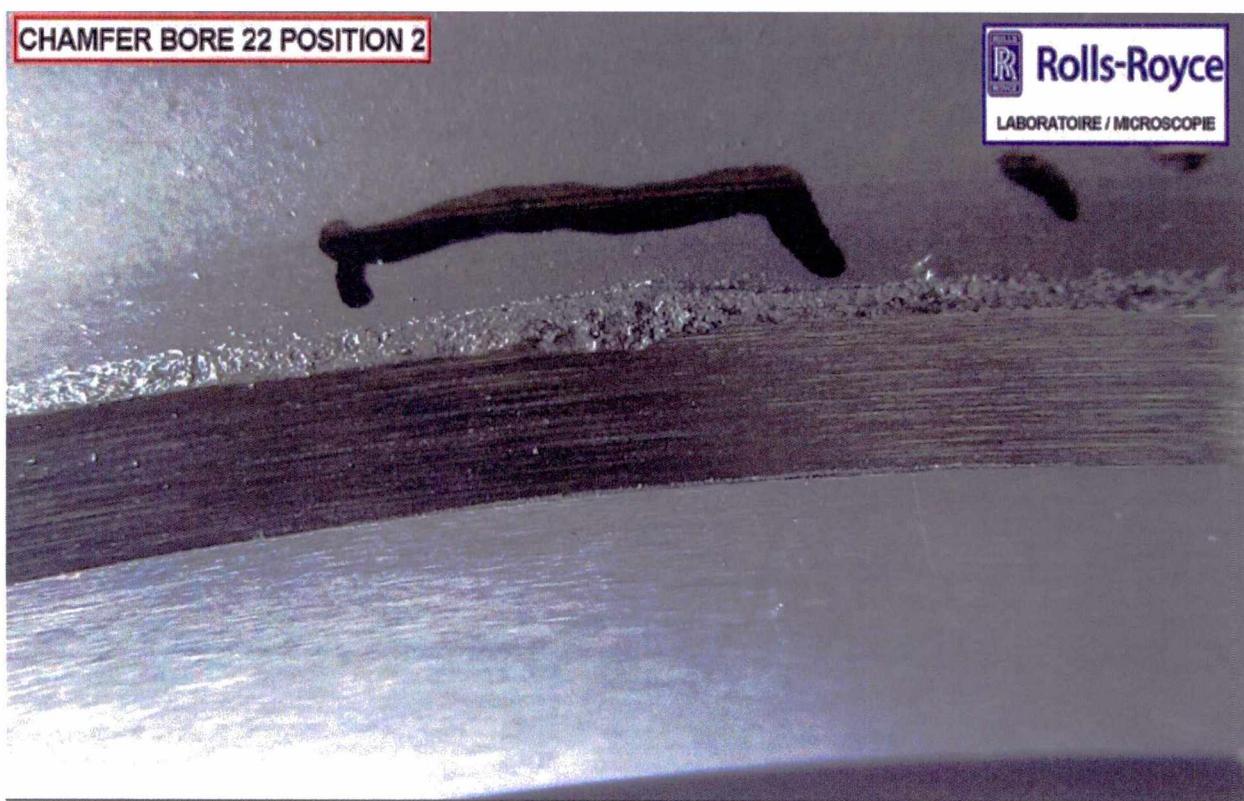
Close-up view to show scoring on the chamfer of the Bore at Location 22
